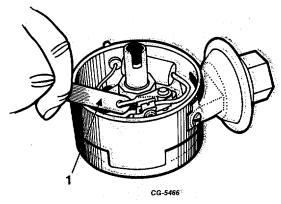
Measuring Contact Point Gap 1. Feeler Gauge
